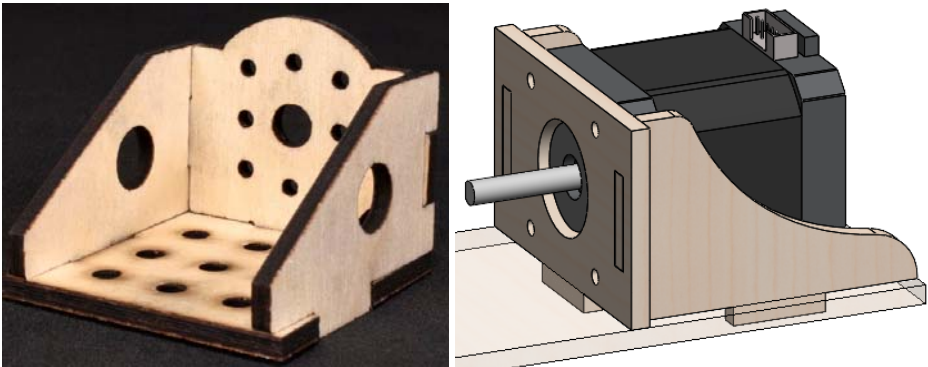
Plywood stepper motor mount a) the idea from the Internet – left [6] b) the created design - right
